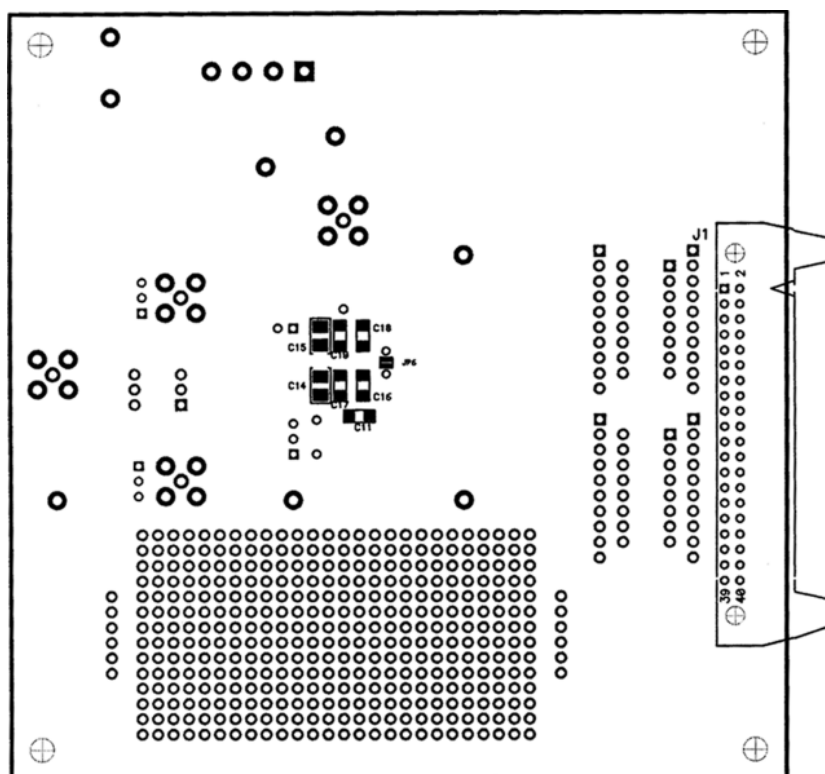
SOIC Evaluation Board Assembly—Secondary Side
